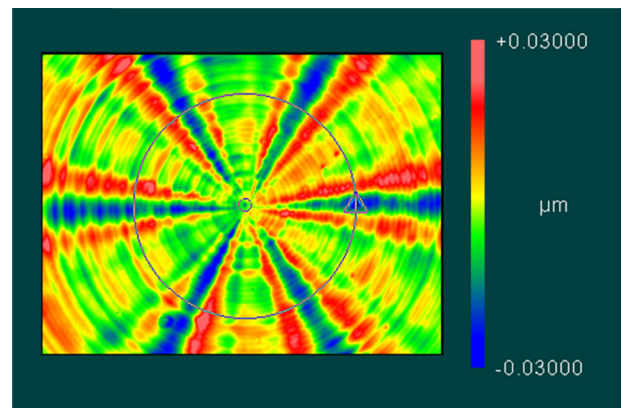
Spindle star formation on a diamond turned copper workpiece.
